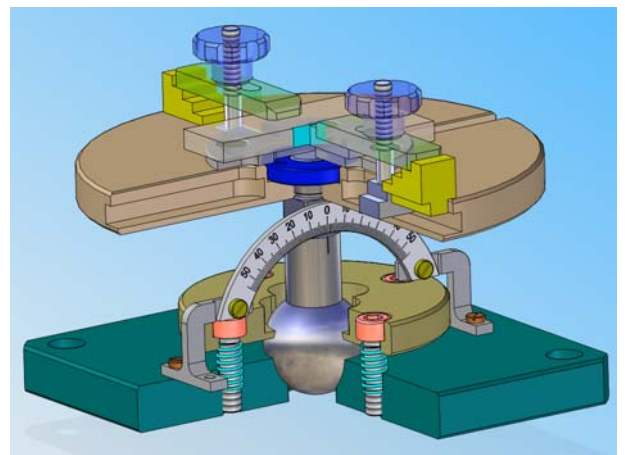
Workpiece holder and orientation device partially sectioned (final design)
